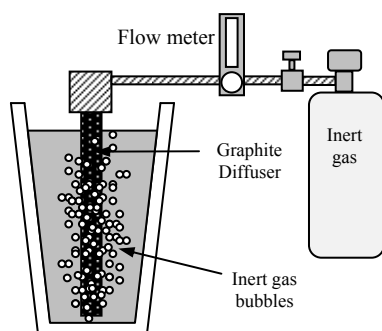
Schematic diagram of the GISS technique [9]. Fig. 2. Spiral fluidity sand mold.
